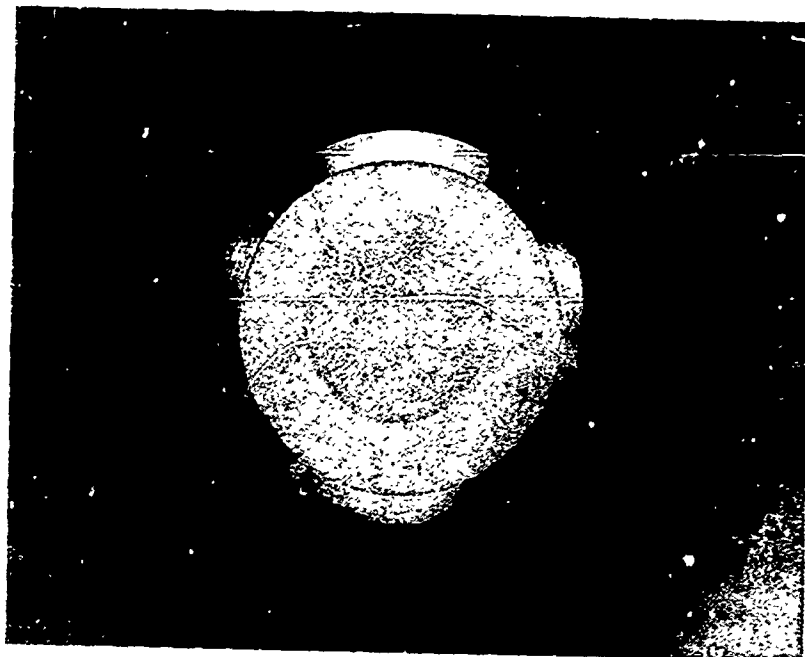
FRACTURE SURFACE OF SAMPLE 19 ROUND FRACTURE
